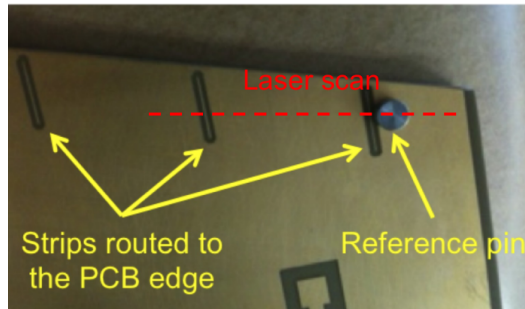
Strips routed to the edge of the PCB with the reference pin to measure the relative alignment of the two η -readout layers.
